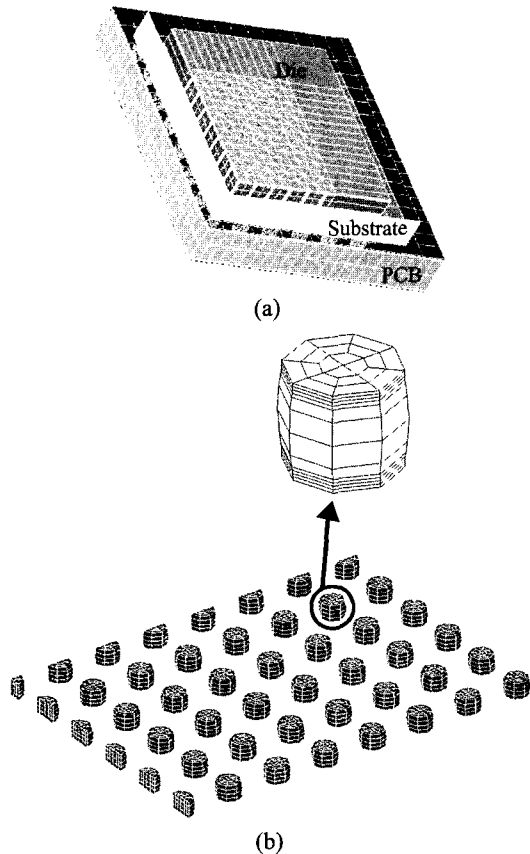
3-D Finite element mesh model of FC-BGA on PCB. (a) 165 FC-BGA, (b) global solder ball.
